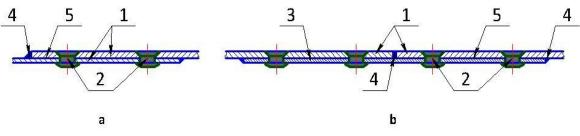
Strong-tight riveted joints a – double riveted lap joint; b – double riveted butt joint with single cover plate 1 – joined plates (skin); 2 – rivets; 3 – cover plate; 4 – sealant; 5 – sealant or adhesive layer
